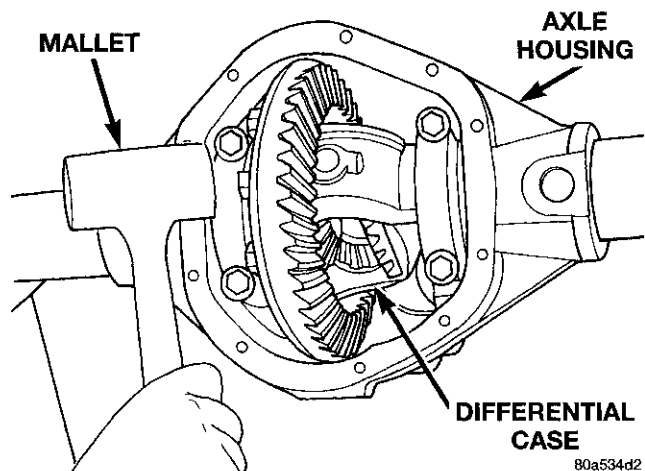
Seat Pinion Gear Side Differential Dummy Side Bearing
